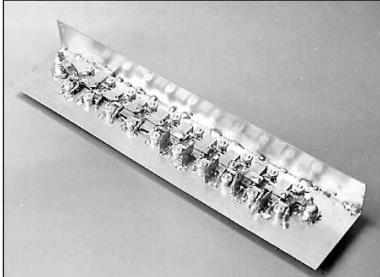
Solder one of the 1-inch-wide chassis side pieces in place to make the assembly more rigid during construction. Solder the side piece to the edge of the top plate that faces the “through” side of the switches; this makes the rest of the assembly easier.
